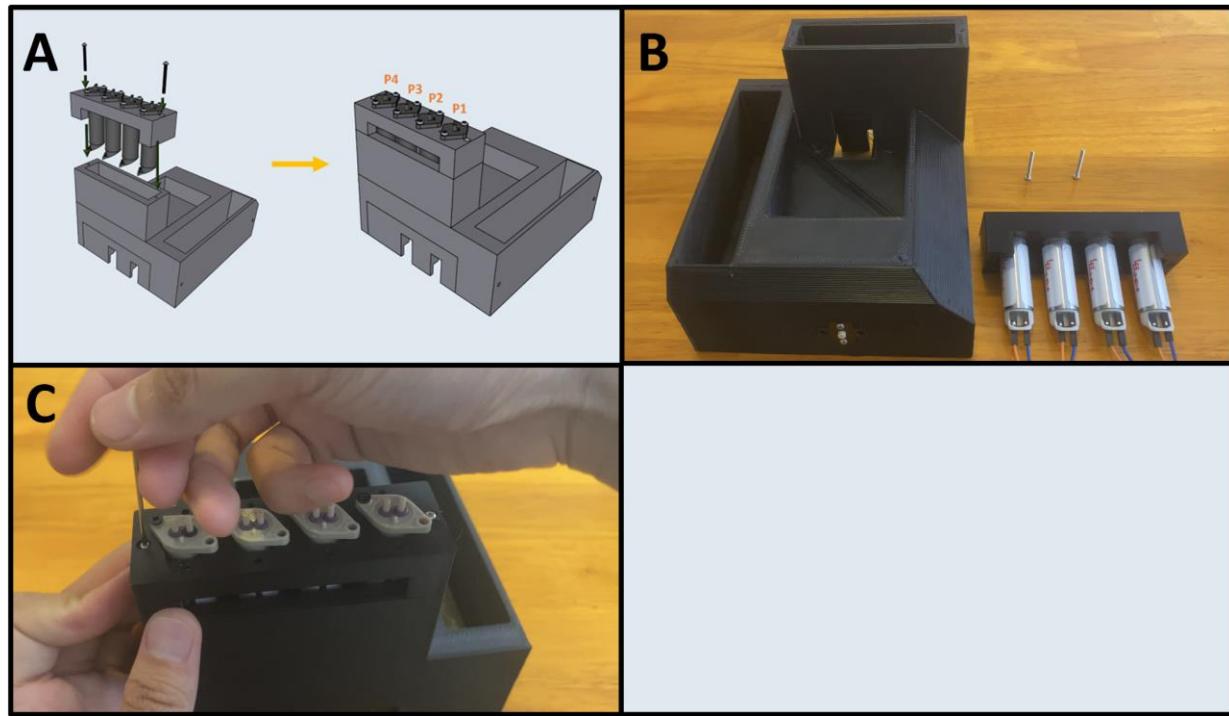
c: The procedure for mounting the Pump Assembly to the Base.
